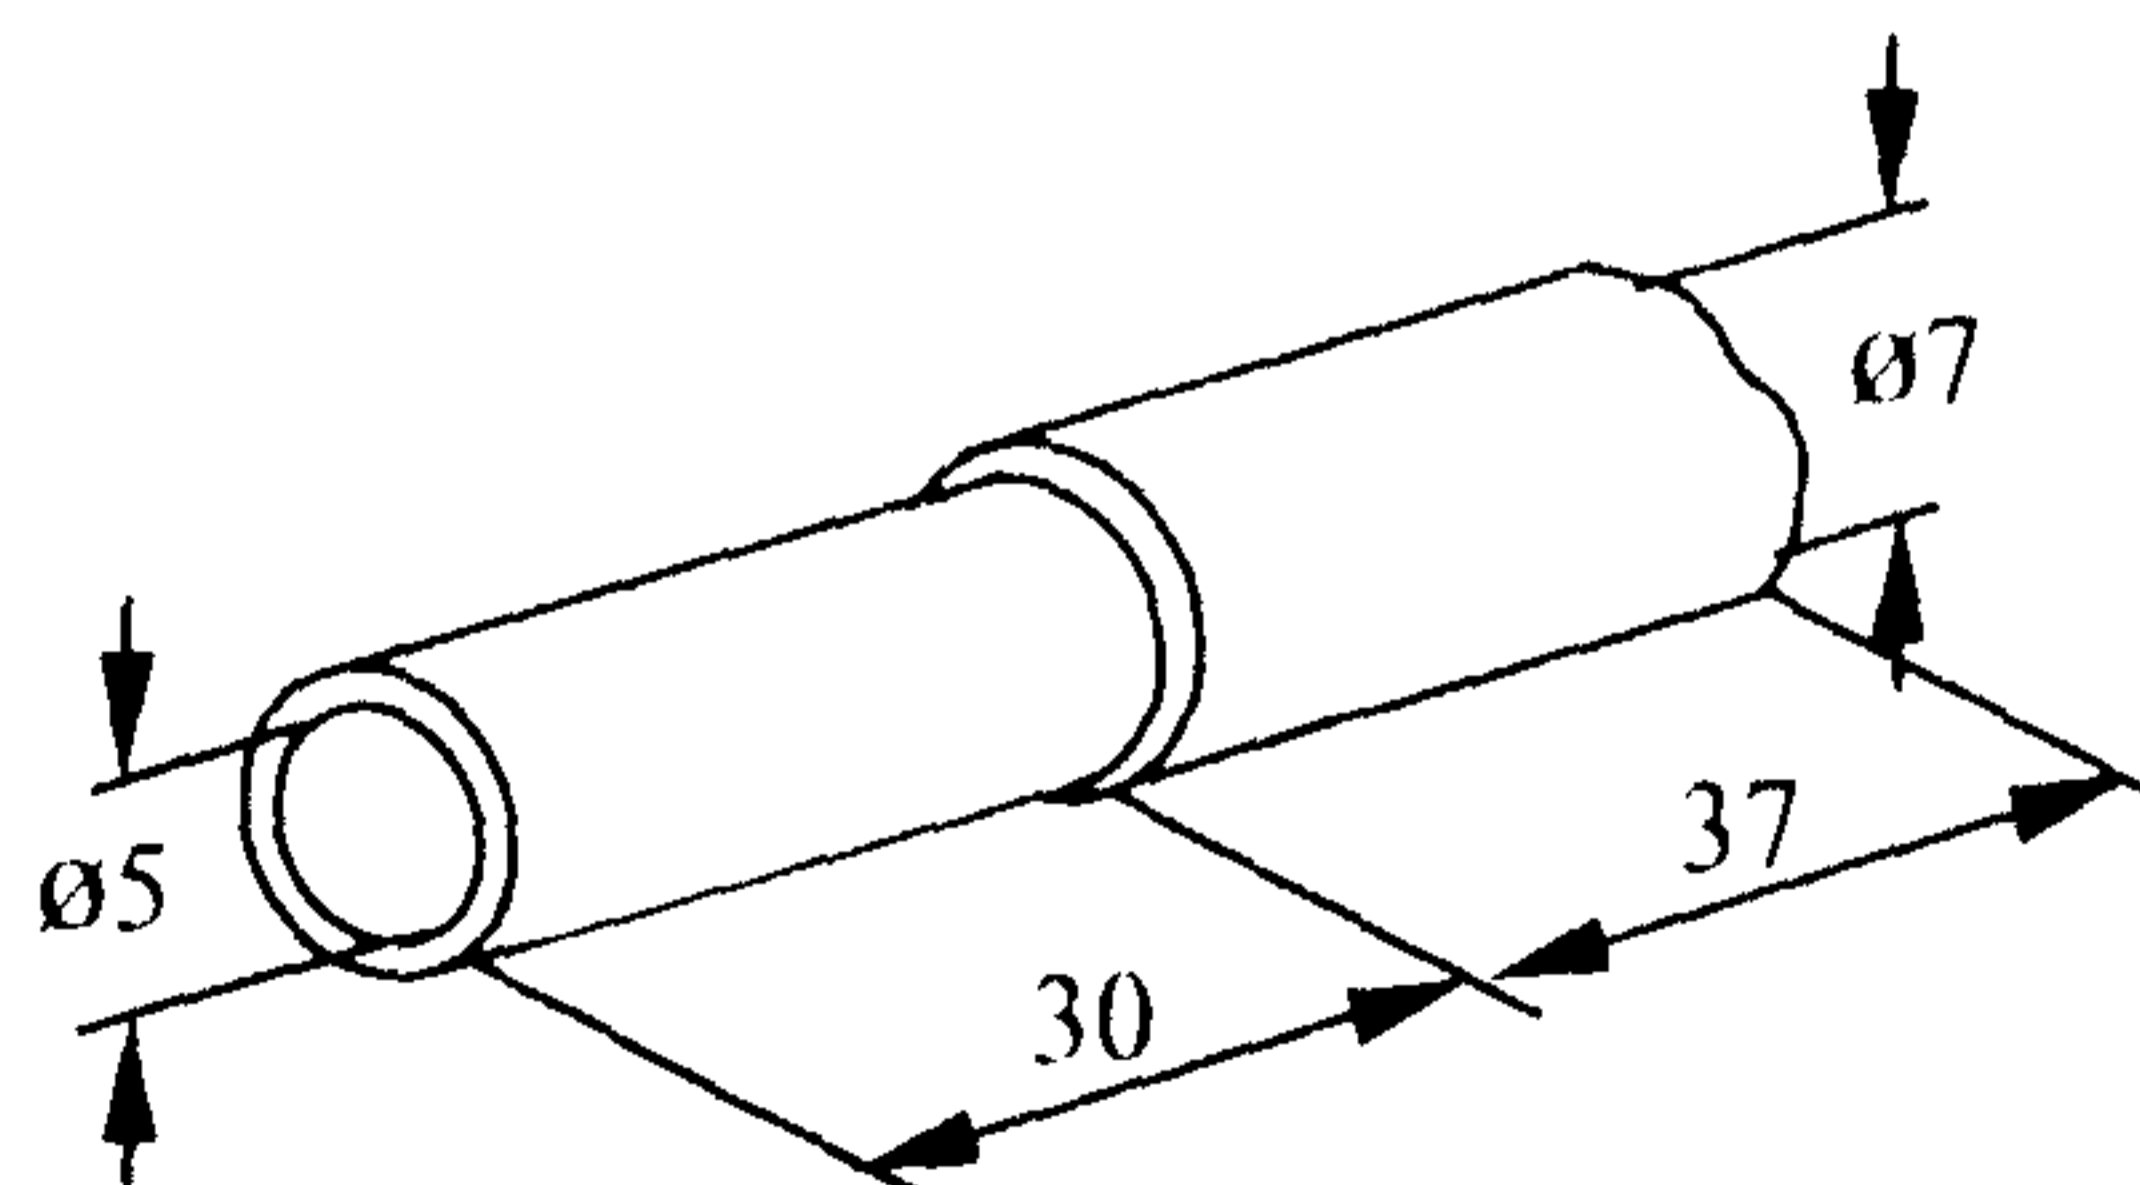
Schematic drawing of the cylindrical nozzle with orifice outlet.
